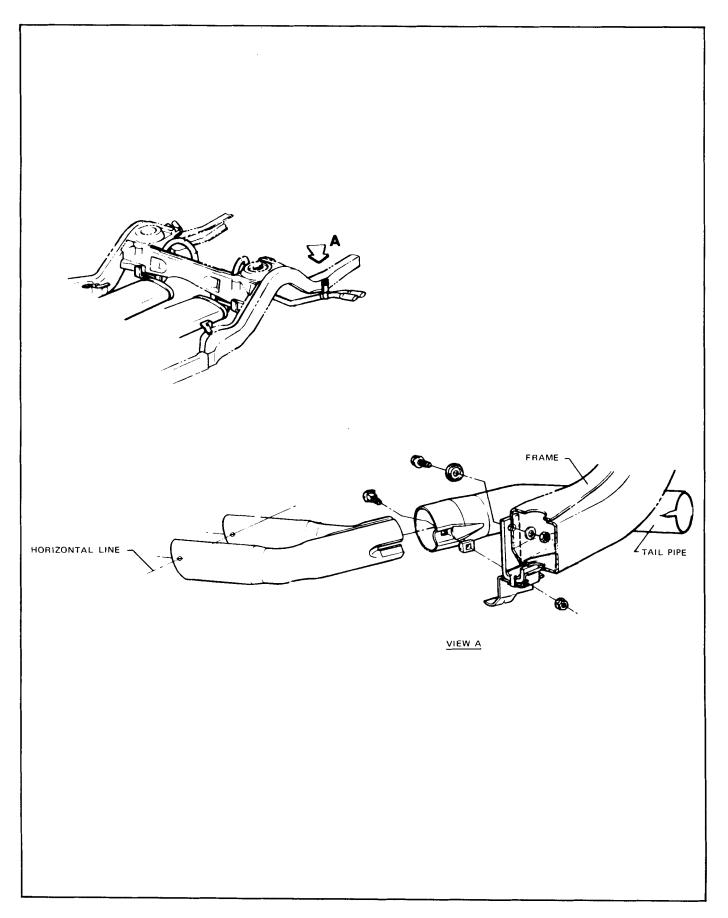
Installation of GTO & GT Exhaust Extension
